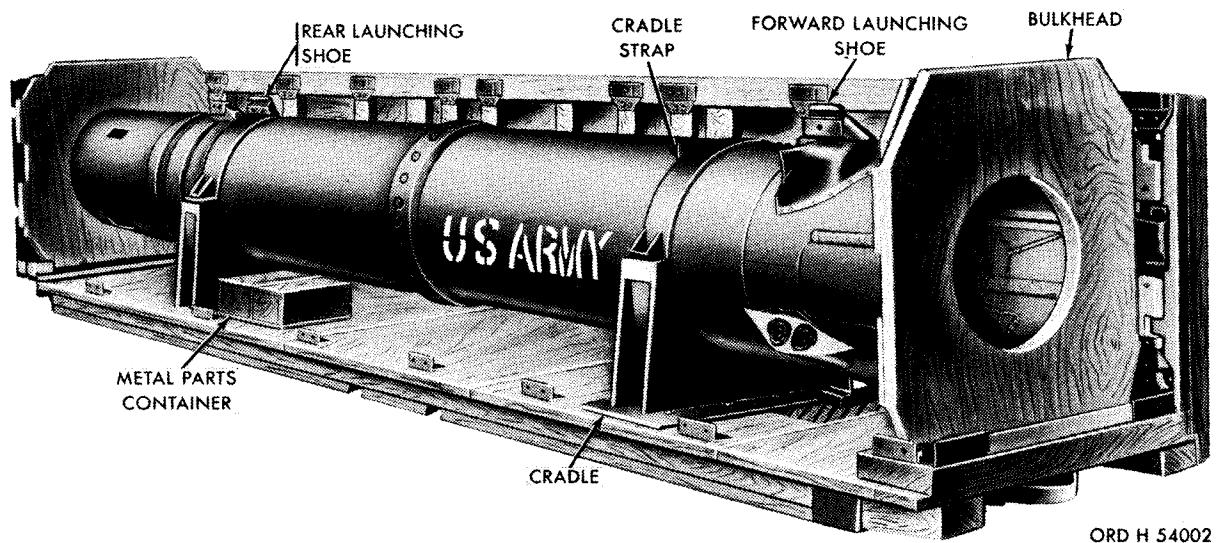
Rocket motor assembly M3 series in plywood shipping container.
